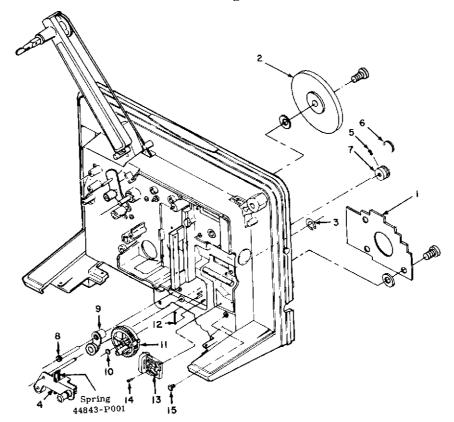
AUTOMATIC LOOP RESET REMOVAL AND REASSEMBLY
